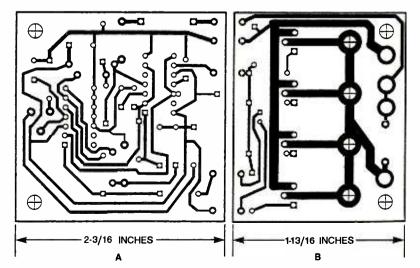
The author's prototype was built on a pair of small printed-circuit boards, referred to as the "main" and "driver" boards. Templates for both boards are here, with the main board appearing in A, and the driver board appearing in B.
